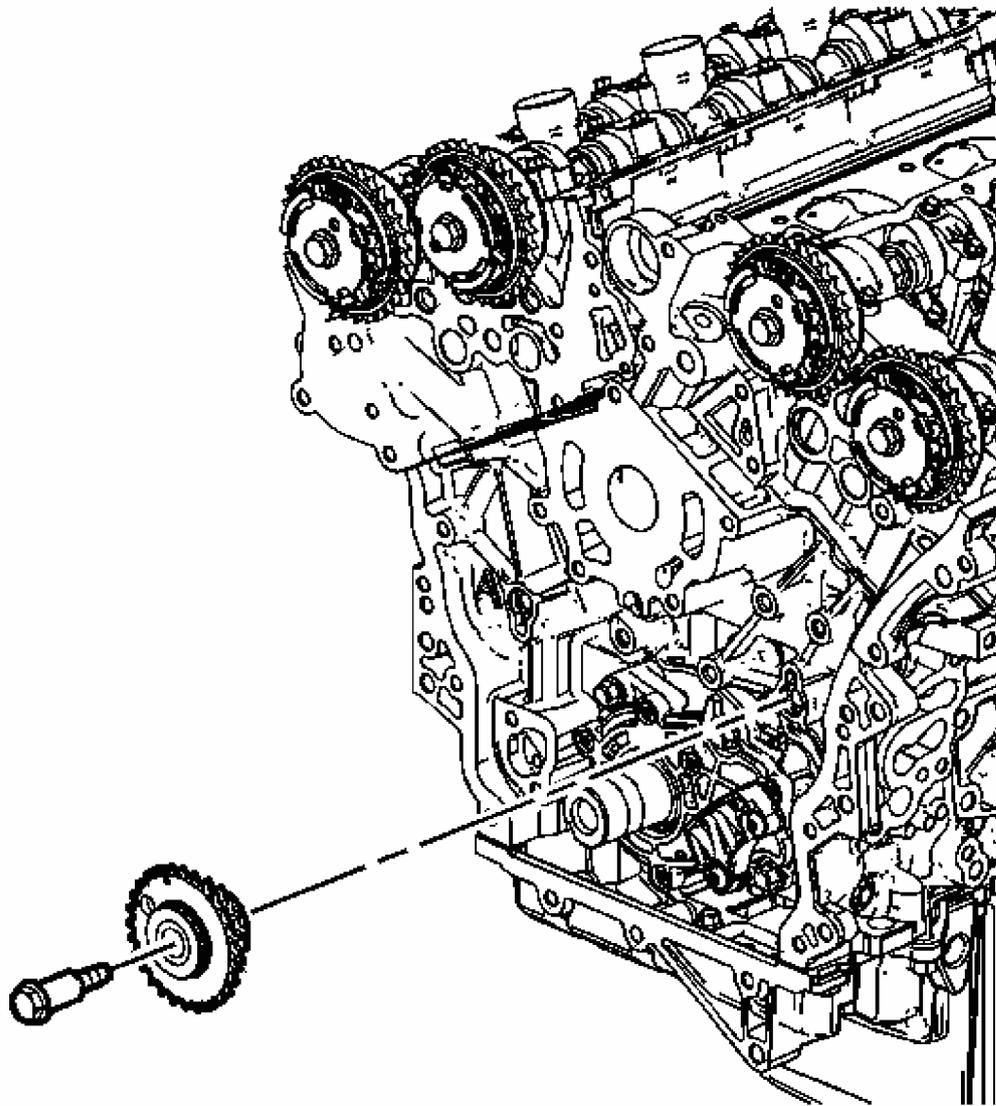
View Of Left Camshaft Intermediate Drive Chain Idler
